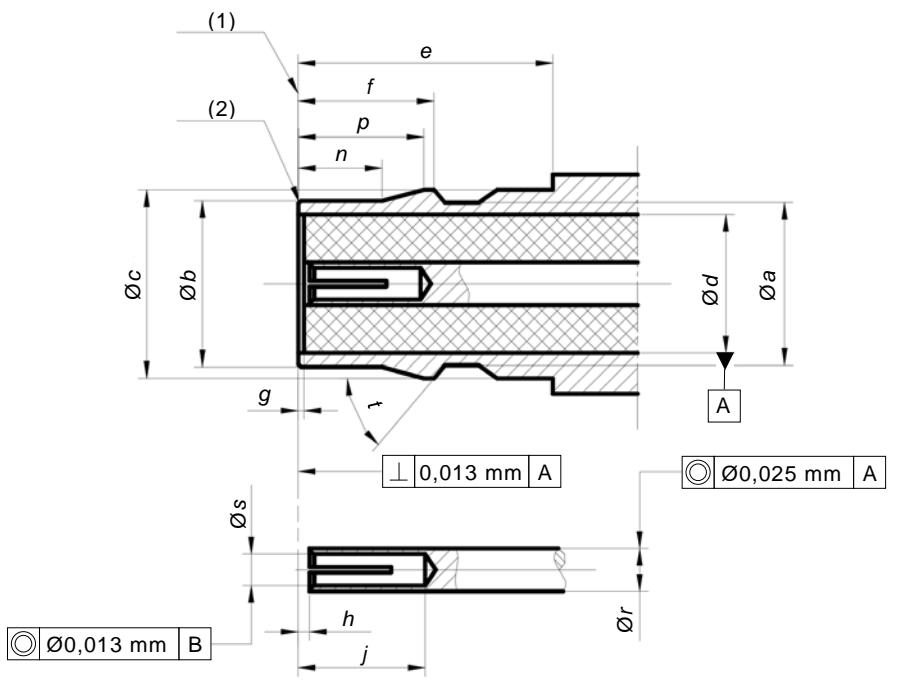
Connector with pin-centre contact (for dimensions and key, see Table 4)
